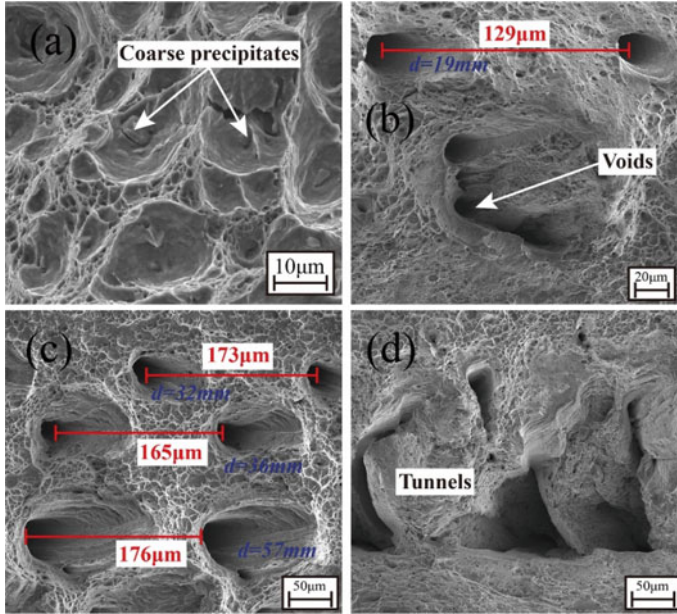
Partly fracture surface morphologies of high depth-to-width ratio FSW: a 30 mm/min, b 300 mm/min, c 400 mm/min, and d 600 mm/min
